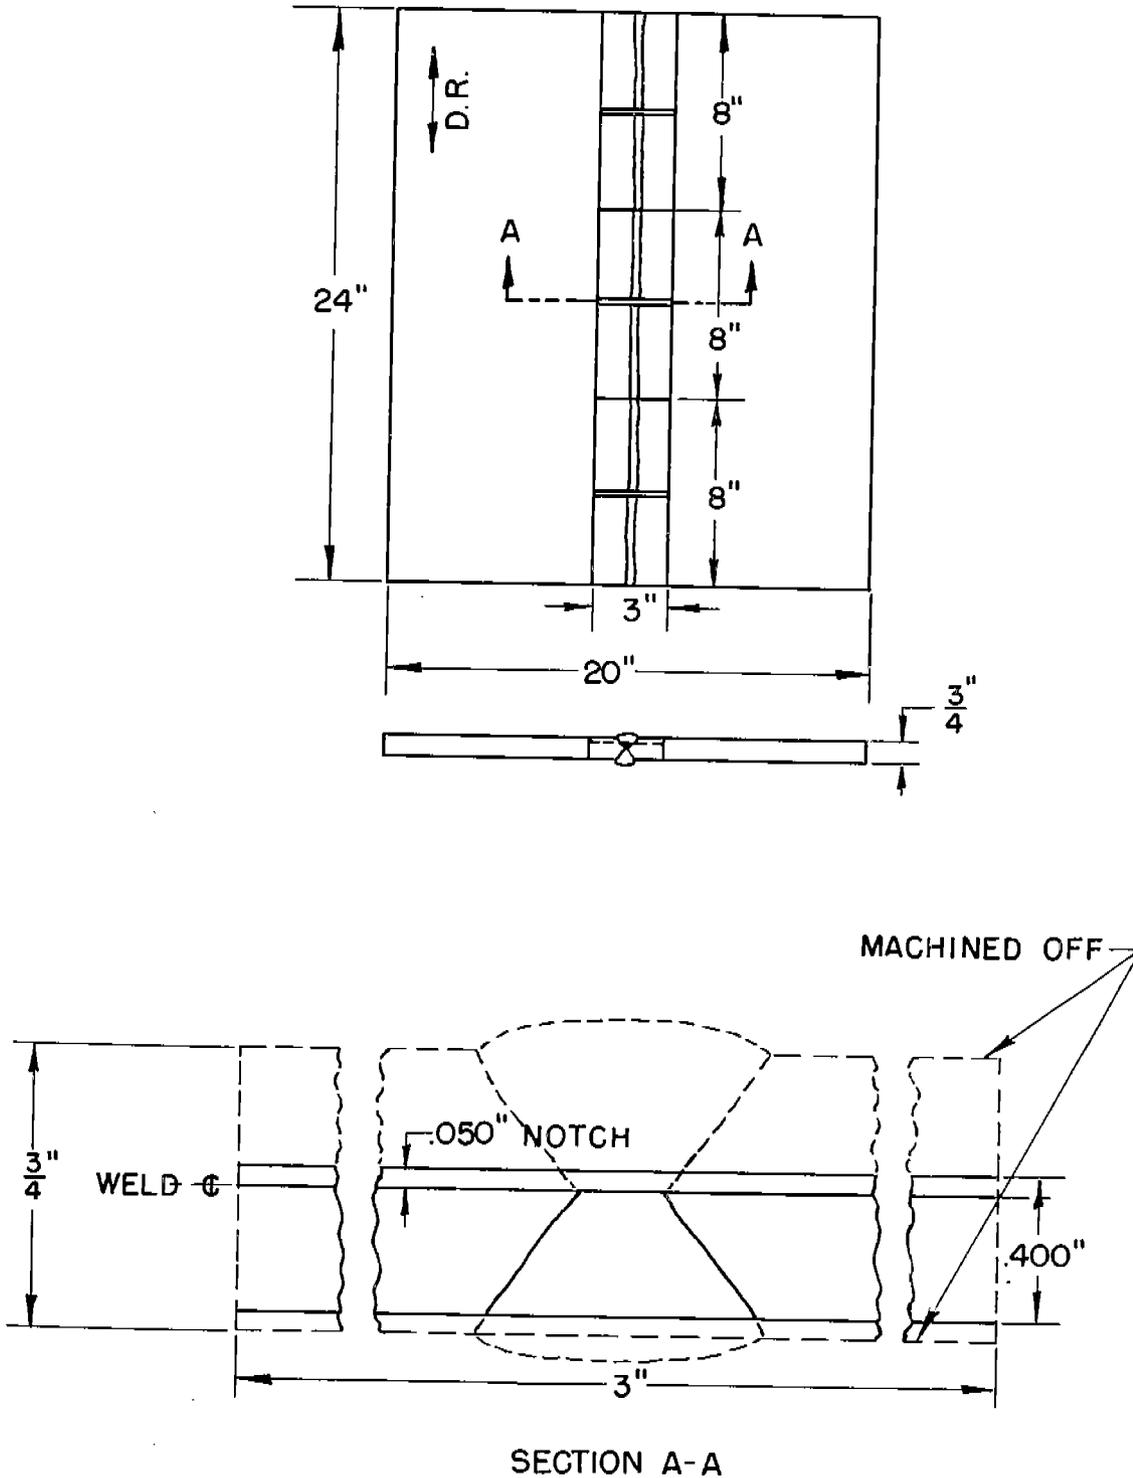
WELDMENT SIMILAR TO THOSE STUDIED AT CASE INSTITUTE OF TECHNOLOGY SHOWING LOCATION AND PREPARATION OF KINZEL-TYPE SPECIMENS
